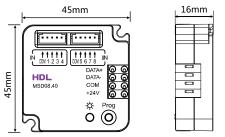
Dimensions-Front View Figure 3. Dimensions-Side View
